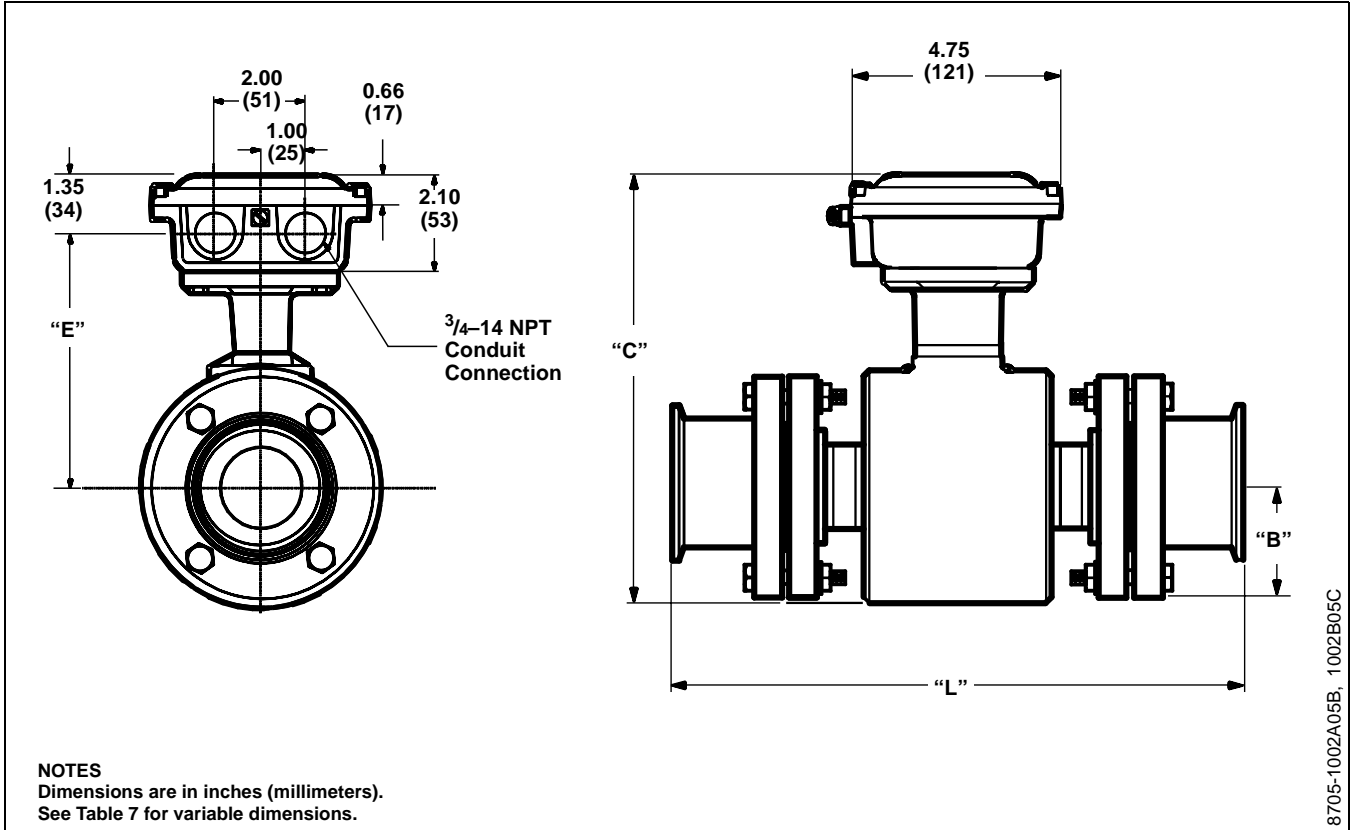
Dimensional Drawing of Model 8705 Sanitary Flowtubes,
